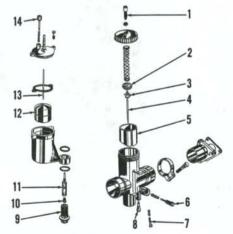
Exploded view of Puch carburetor used on 250cc models.
